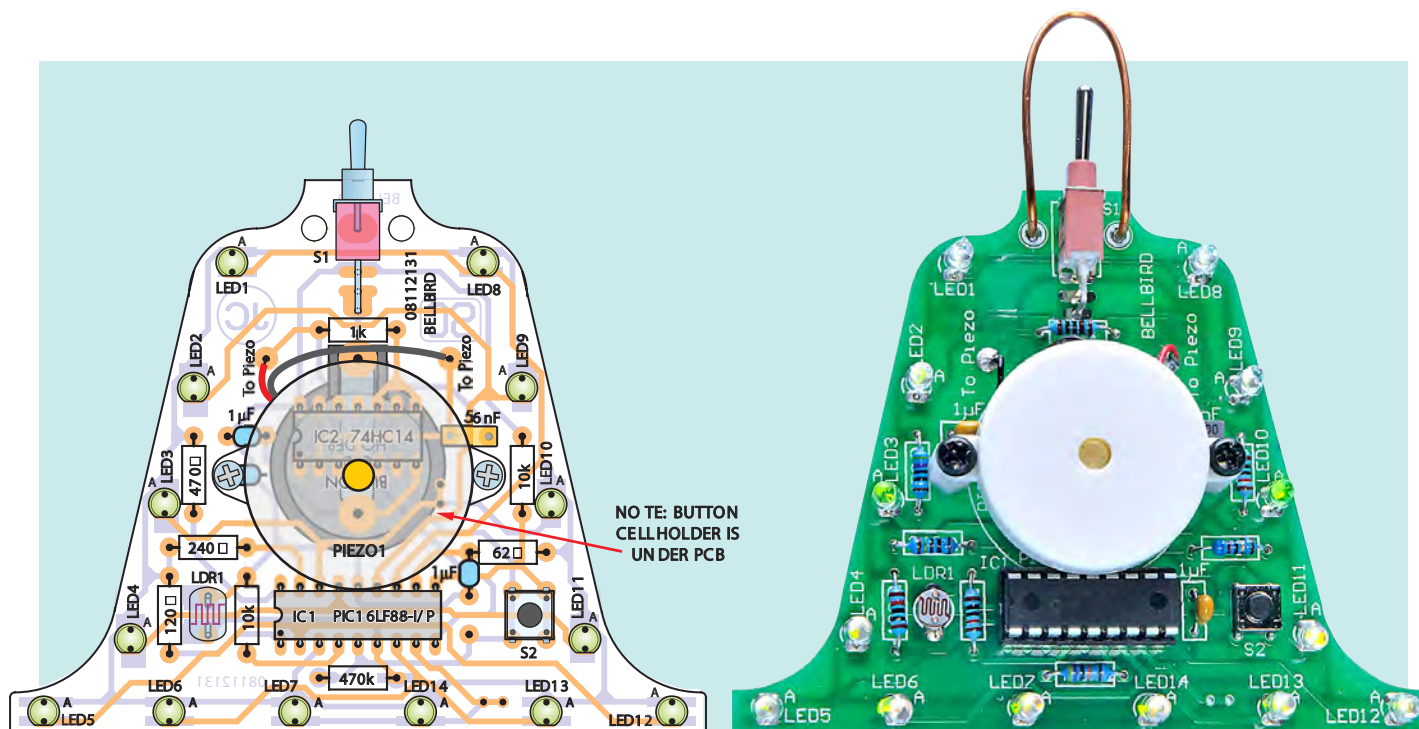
follow this parts layout diagram to assemble the parts onto the bell-shaped PCB. The piezo transducer is mounted on M3 × 9mm nylon spacers, while the button cell holder is mounted on the back of the PCB (see photo). Note that it's a good idea to mount the LEDs 5mm proud of the board so that they aren't obscured by other parts.
